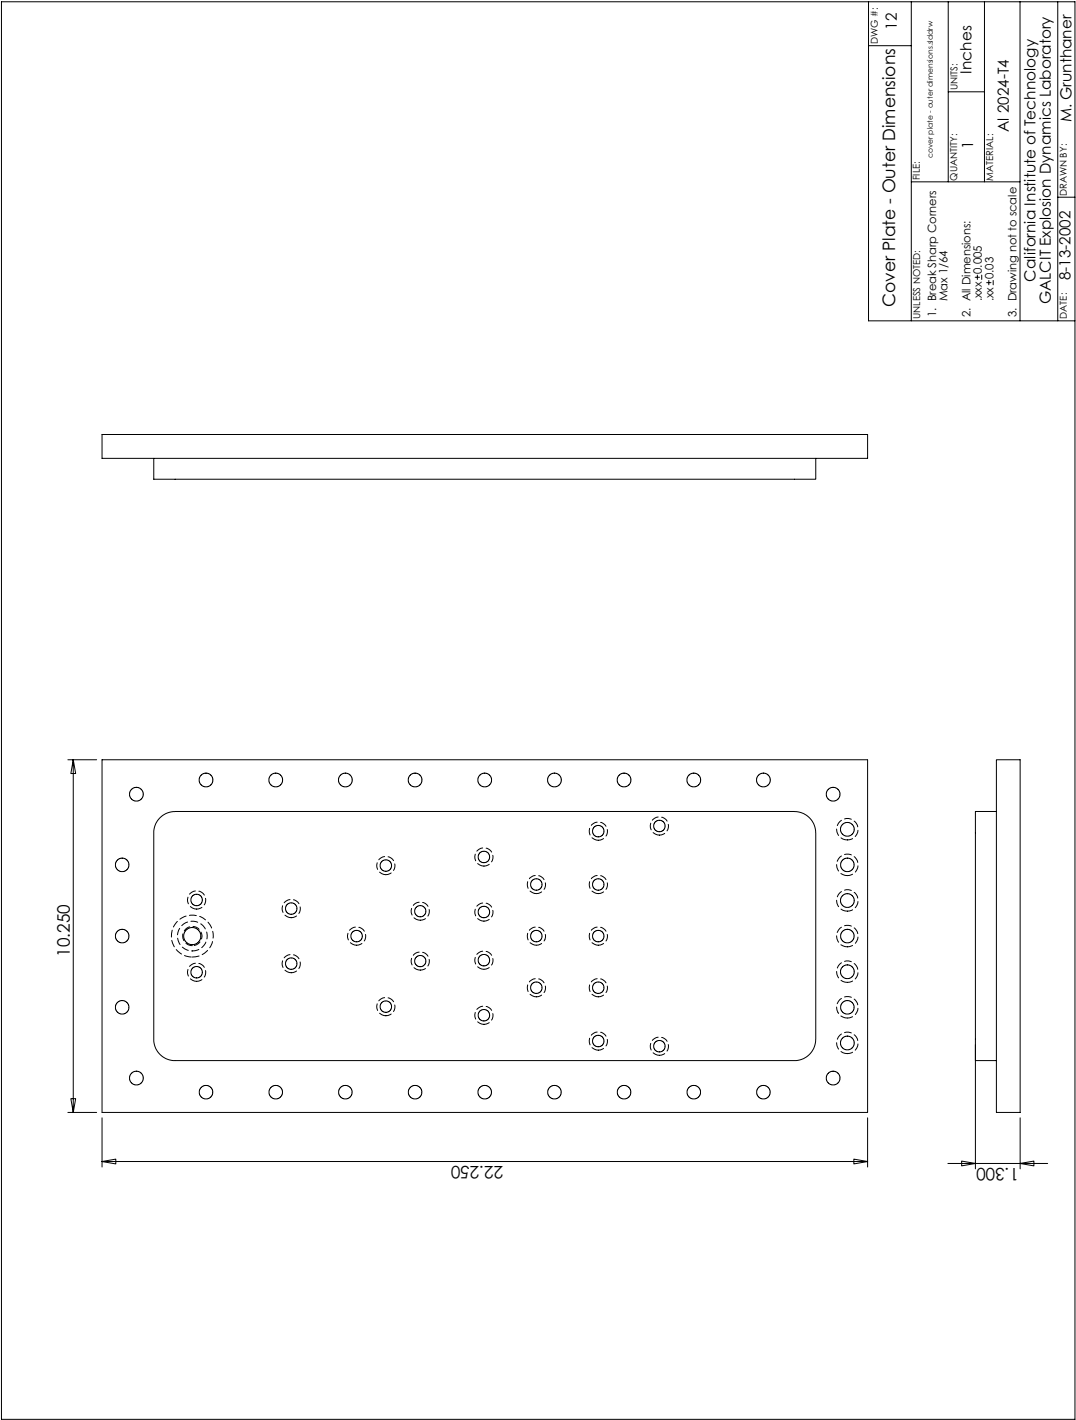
Cover Plate - Outer Dimensions, Dwg No. 12
